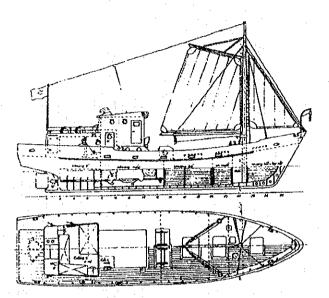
General Arrangement of a Typical Large Coastal Boat (Source: Nguyen Dang Cuong "Tuyen Tap Mau Tau Ca Vietnam")
